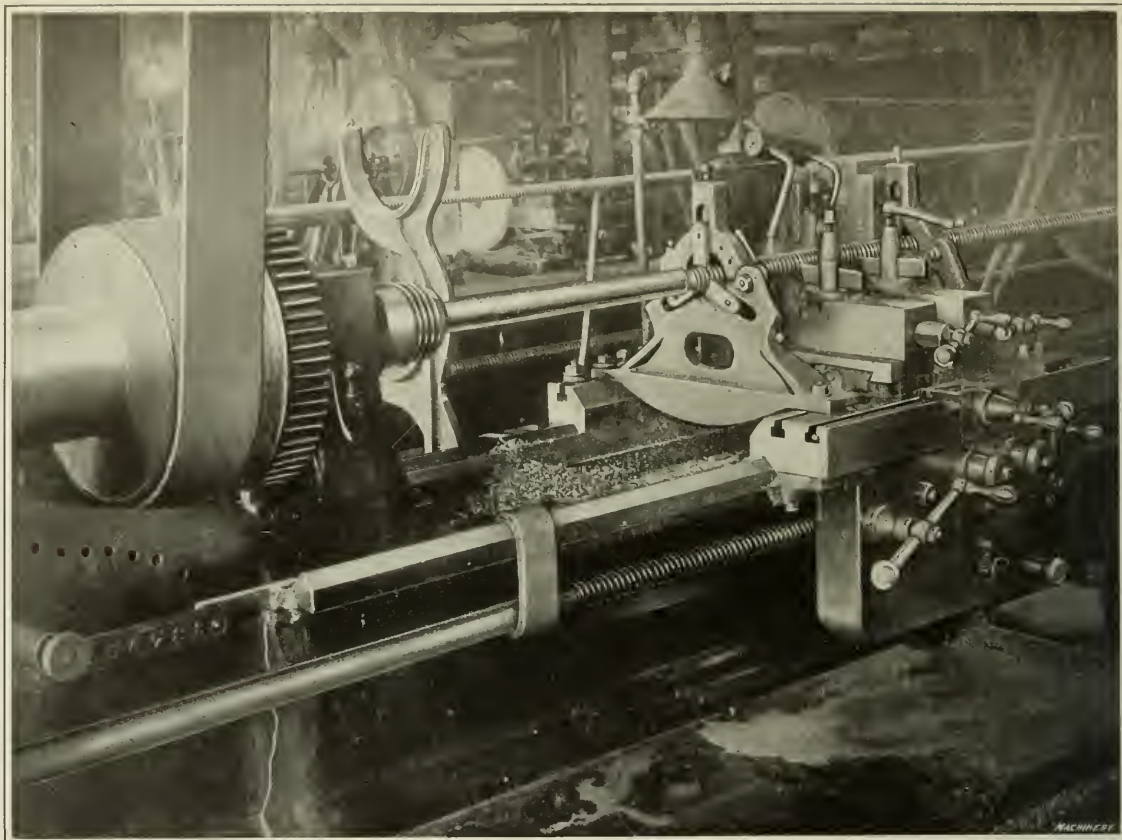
Chasing Precision Screw in a Lathe with Two Tools
